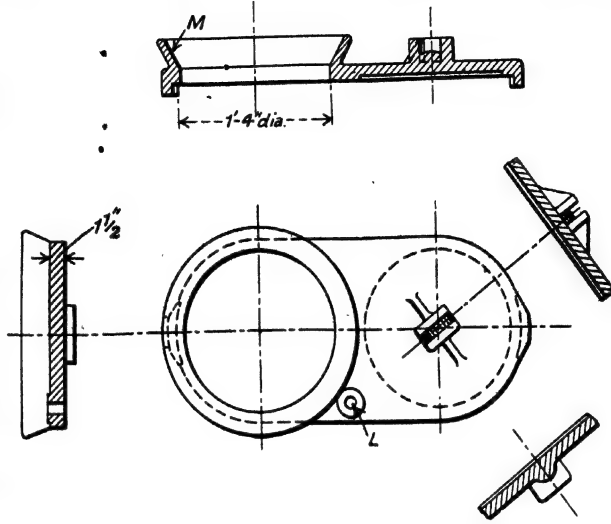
DETAIL OF TOP SLIDE FOR STATIC FUEL-CHARGING HOPPER.
